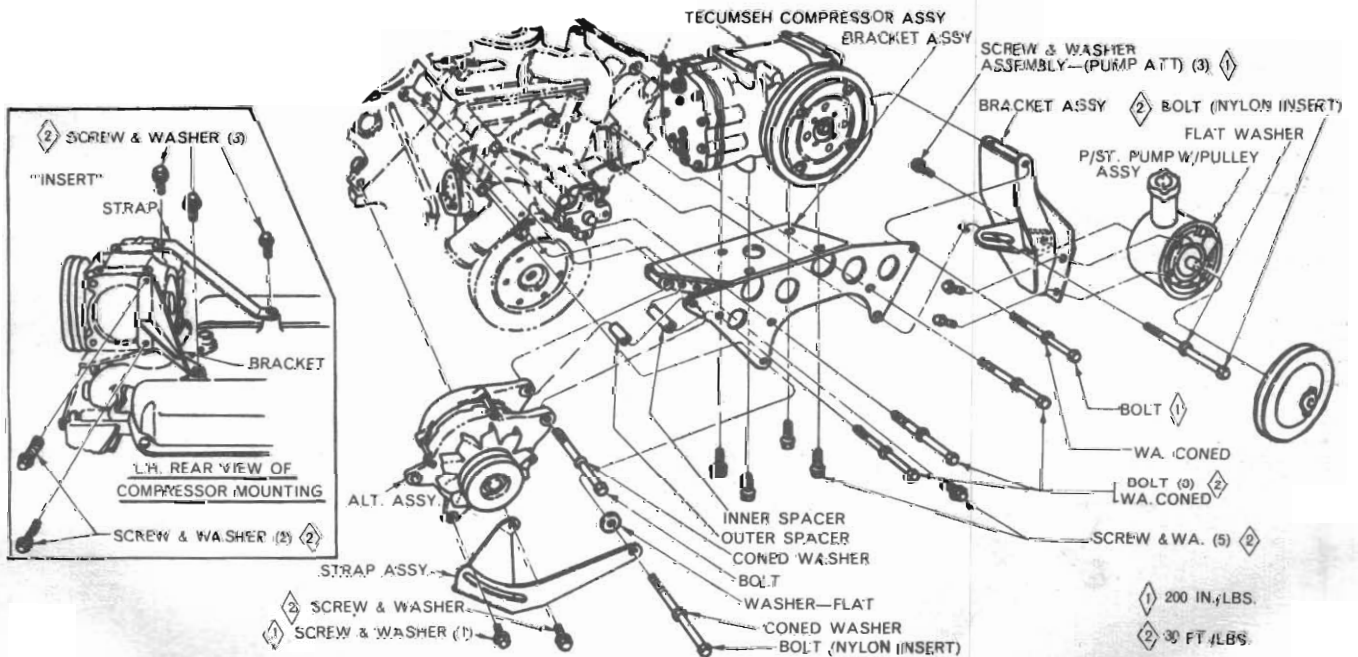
Accessory Drive Component mounting arrangement showing Compressor positioning
